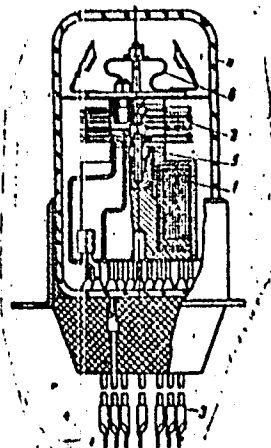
1- electromagnet coil; 2- contact system; 3- bantam mount; 4- tube; 5- armature; 6- omega-shaped laminated spring
